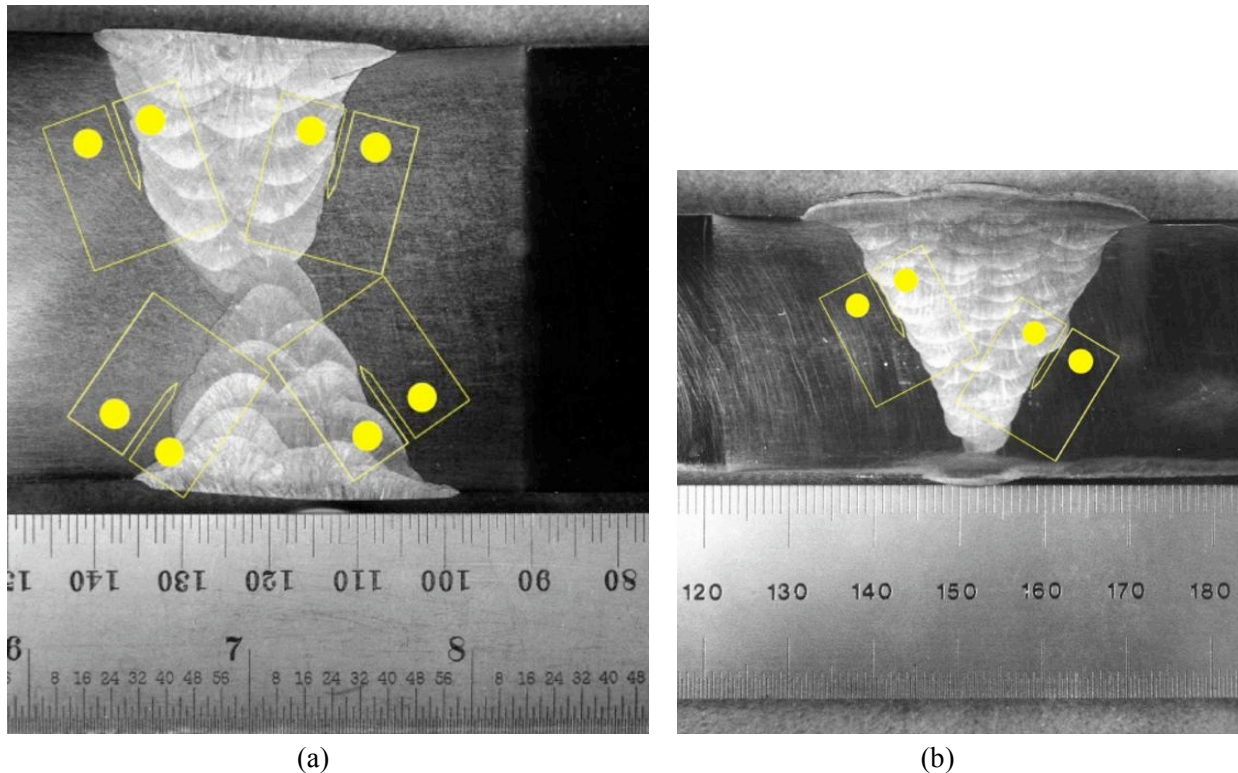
Notch location in the (a) Grand Gulf SA weld HAZ and (b) laboratory-prepared SMA weld HAZ.
